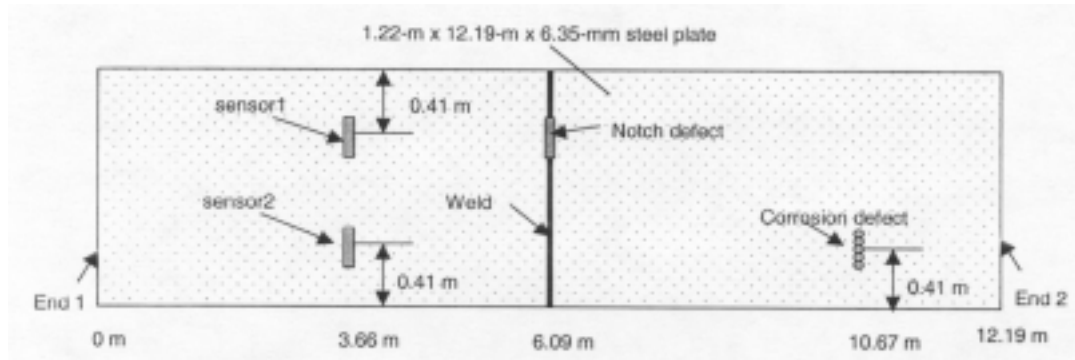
illustrates the configuration of test plate and setup used in the experimental investigation. The test plate sample was 6.45-mm thick and approximately 1.22-m x 12.19-m in overall size. It was made by full-penetration welding two carbon steel plates. Two 20-cm-long, thin-strip, sensors were adhesively
